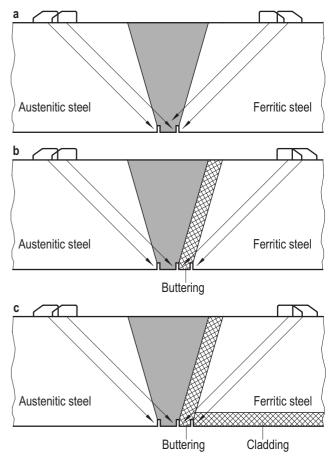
Location of notches and beam angles for the examination for longitudinal defects of welded joints between ferritic steels and austenitic steels
